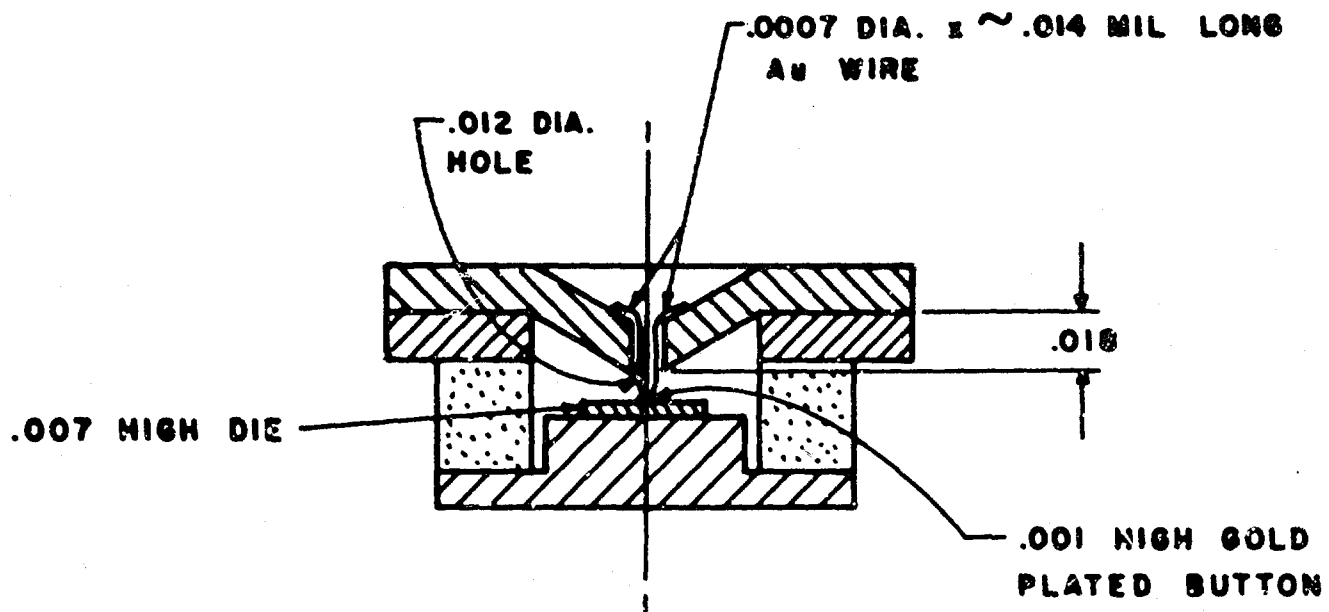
Schematic of Modified "A" Pill Package With Die Bonded to Pedestal and Wire Bonded to Cone-Shaped Electrode
